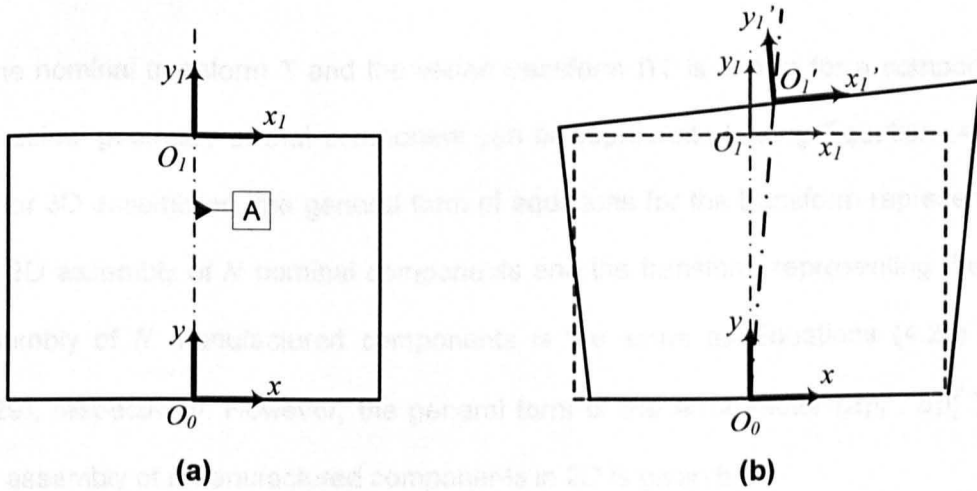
(a) Nominal rectangular component symmetric about axis A; (b) Manufactured “rectangular” component
